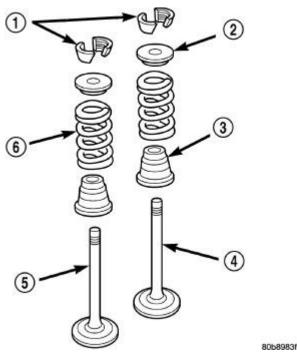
Valve Assembly Configuration Courtesy of CHRYSLER LLC
